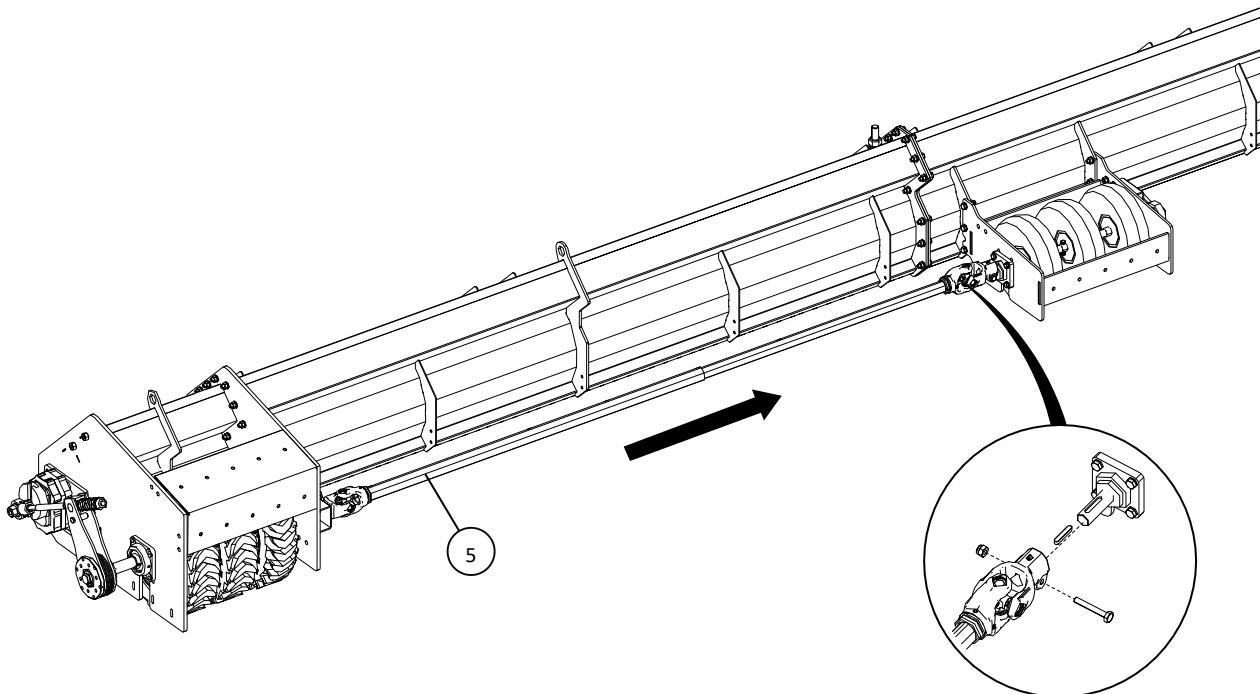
Installing the Second Drive Wheel (FSA05226 – FSA05236 and FSA10226 – FSA10236 Models)
